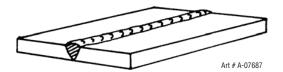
Flat Position, Down Hand Butt Weld
